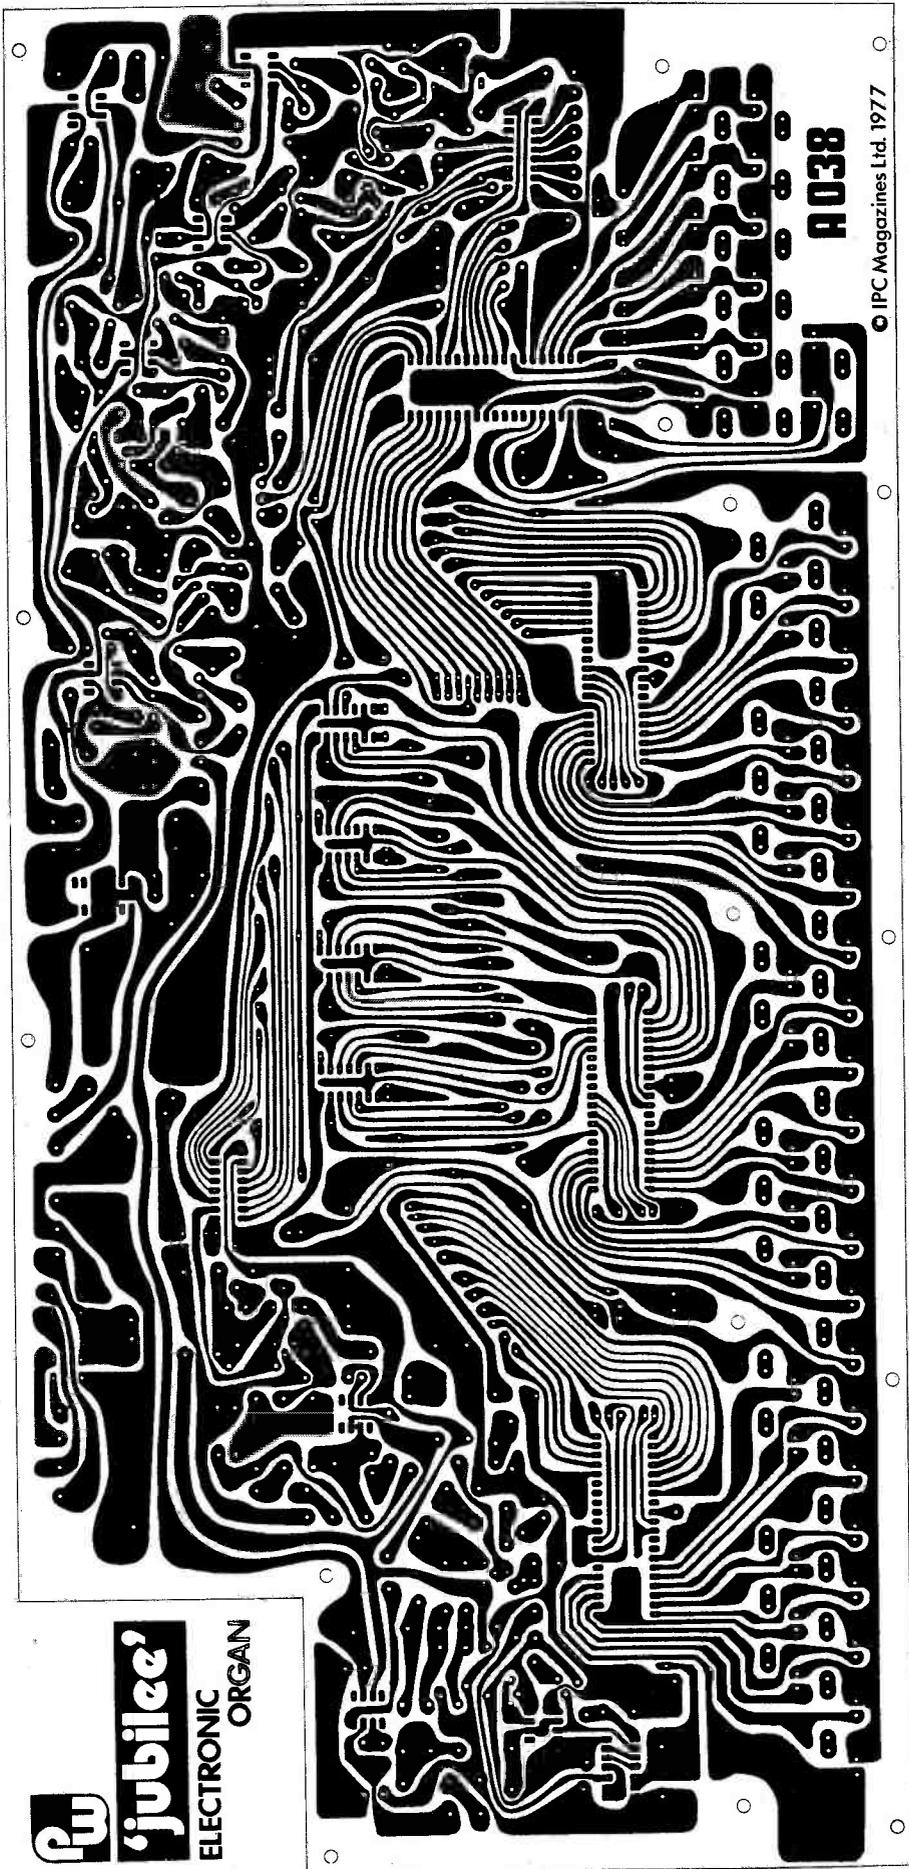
The PCB shown copper side. This drawing has been reproduced at under half the original size to fit in with the page format of the magazine. The actual PCB size is 50.8 x 24.1 cm. Full size prints for PCB reproduction purposes can be supplied from the editorial address at the front of the magazine, price 40p. Be sure to include a large (at least 13" x 8") stamped and addressed envelope with the cheque/money order.
